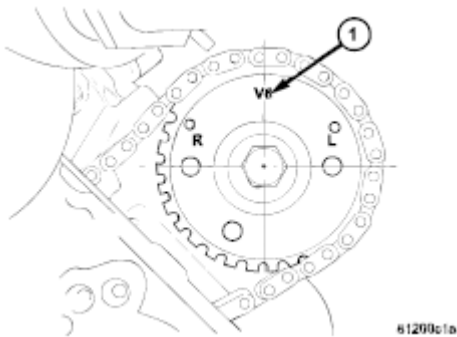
Identifying V6 Mark On Camshaft Sprocket
